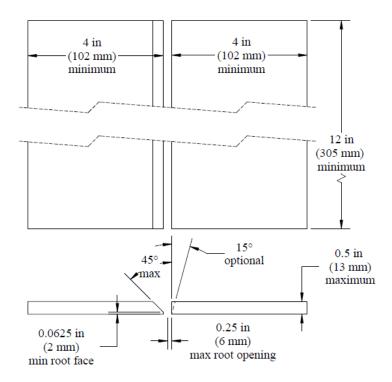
Welder and welding operator qualification plate T less than 0.5 inches inclusive.
